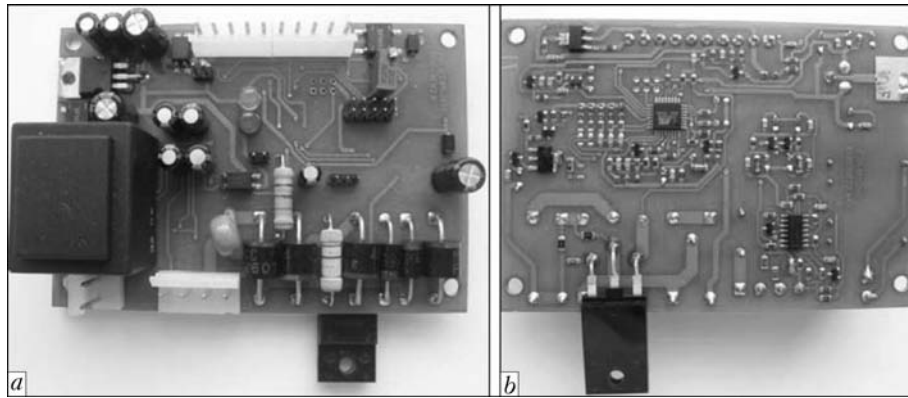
General view of front (a) and rear (b) side of board for pulse stabilizer of AC welding arc
